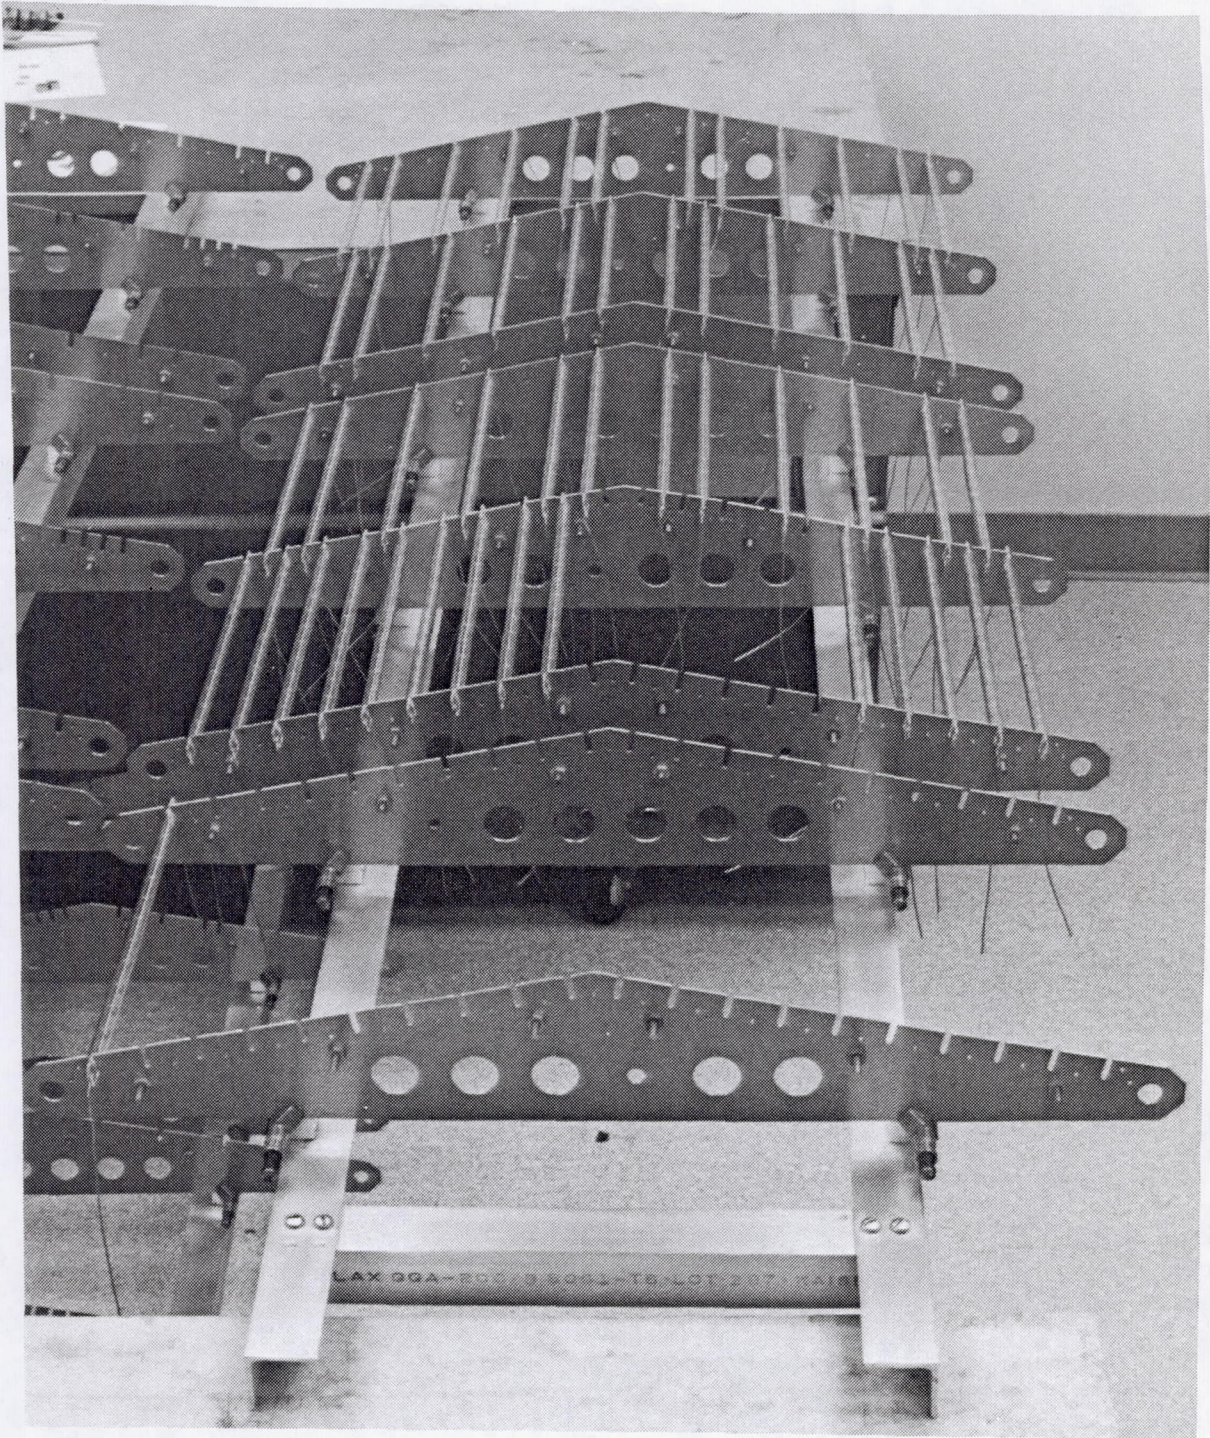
Positioning of Lamp Bus Plates On Rails For Assembly of Axial Zone
